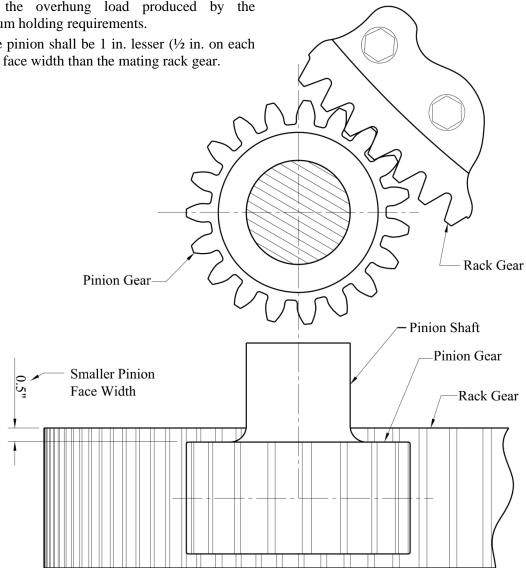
Typical Pinion and Rack Gear Assembly for a Mechanical Swing Span Bridge
